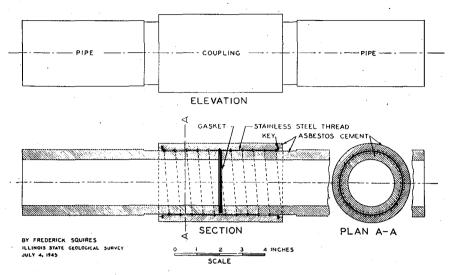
This is a scale drawing showing way in which the three materials, asbestos-cement for pipe and coupling, rubber gasket, and spiral metal thread are combined to produce a corrosionless assembly. Corrosive fluids cannot come in contact with corrodable material. This assembly solves the corrosion problem for lead lines and cemented-in casing for salt water disposal wells. each end so that the thread cannot back out with the pipe when the joint is unscrewed. A gasket is provided between the pipe ends, which is compressed when the pipe is coupled up tight. Corrosive fluids traversing the pipe and coupling can never come in contact with any corrodable material. Such an assembly solves the corrosion problem for lead lines and cemented-in casing for saltwater disposal wells.
